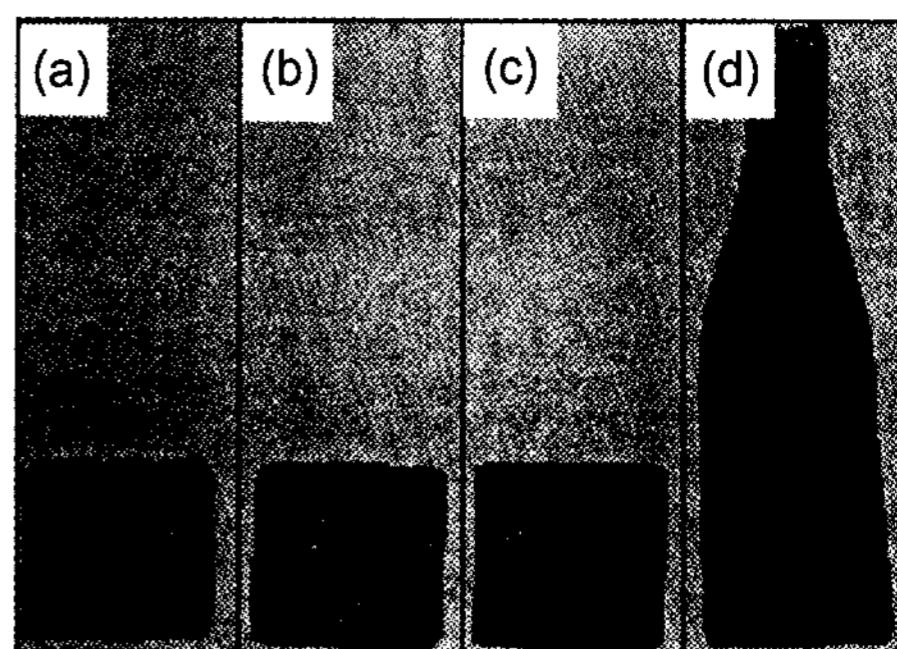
Residuals in tundish after strip casting. Molten metals were poured at (a) 850°C , (b) 775°C , (c) 755°C and (d) 745°C , respectively.
